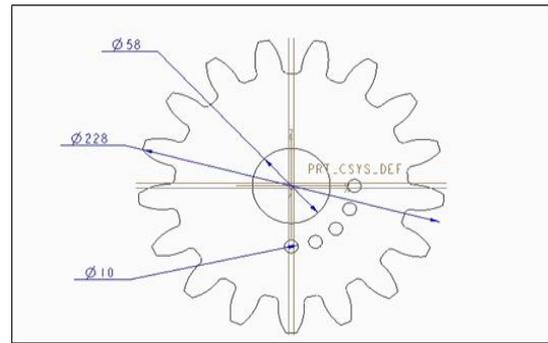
Creo Drawing of Healthy Spur gear and Pinion
